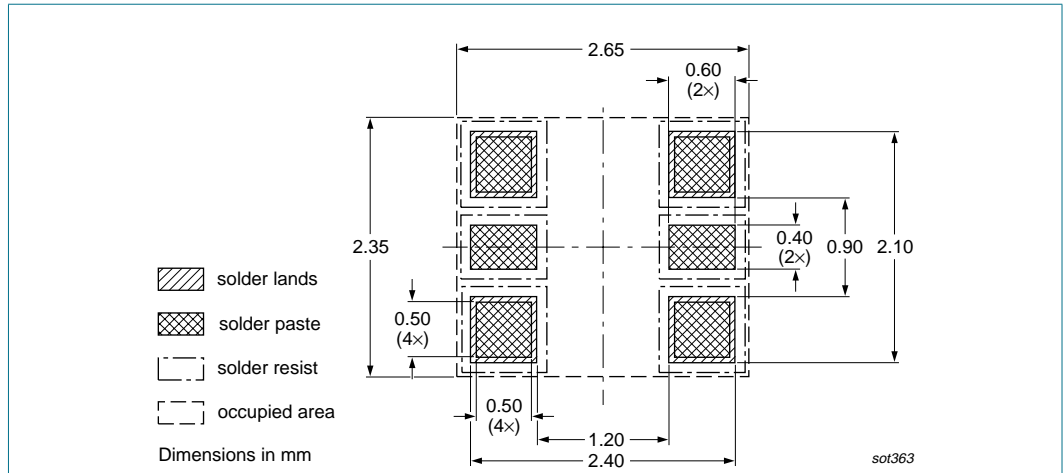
Reflow soldering footprint BAV70S (SOT363/SC-88)
